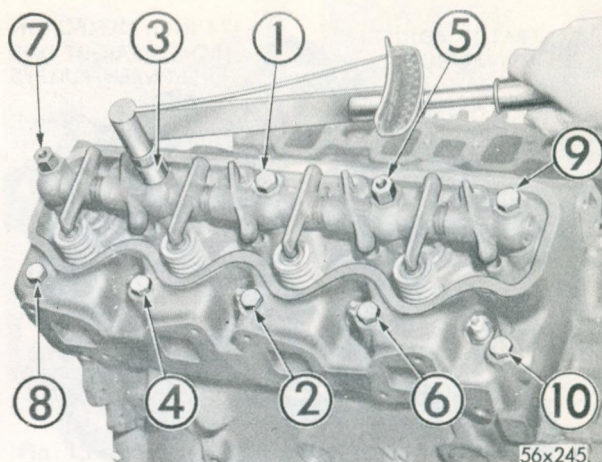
Tightening Cylinder Head Bolts (SpitFire)
